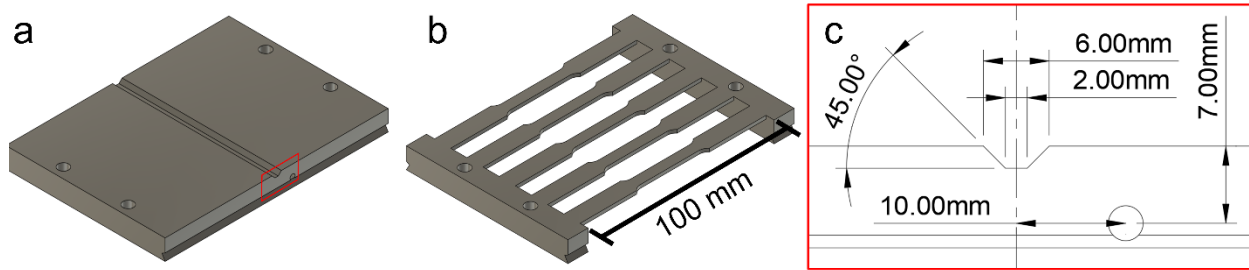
Drawing of the trapezoidal groove cross section and thermocouple location with dimensions.
